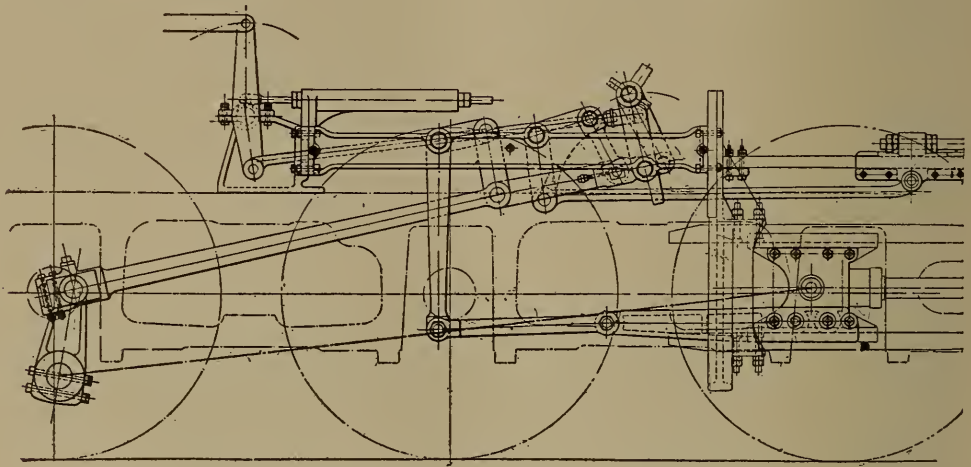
OUTLINE OF BAKER-PILLIOD VALVE GEAR.
